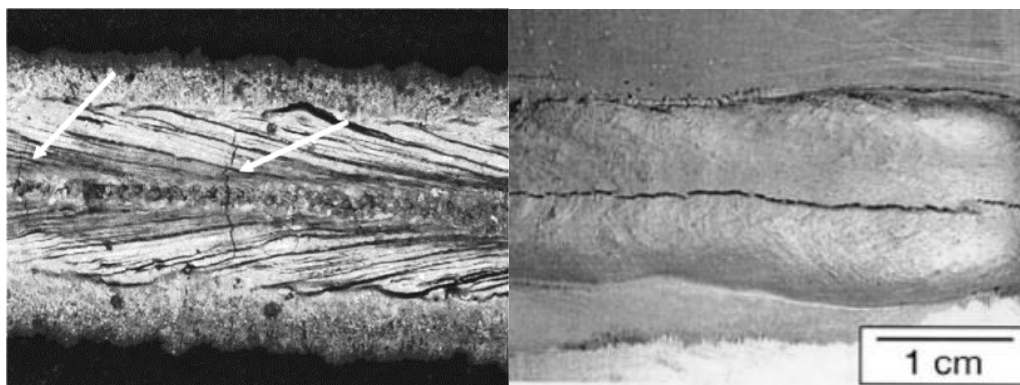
Transverse cracks found in AA7075 weld samples [235] and solidification crack running through the centre of the GMA weld of AA6061 aluminium
